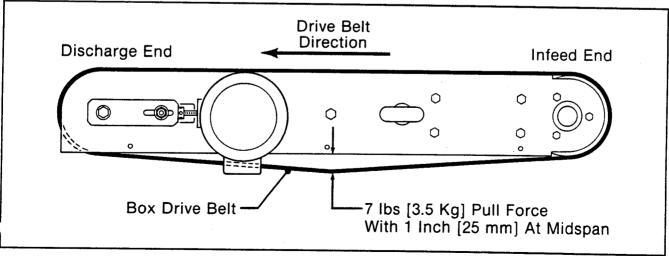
C - Box Drive Belt Tension Adjustment - Top View
